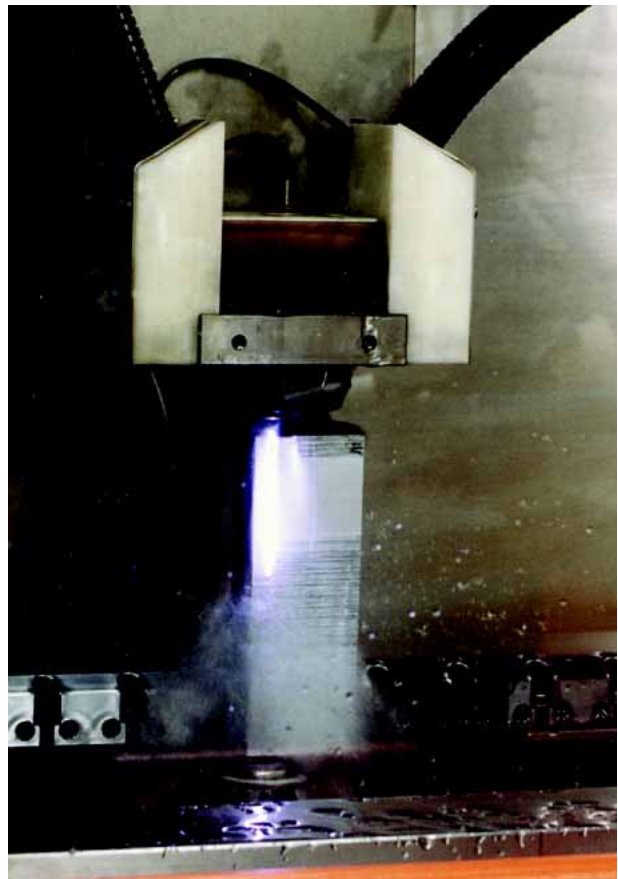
Wire electrical discharge machining for complex shapes. The bright glow is where the charged wire is burning away the metal.
